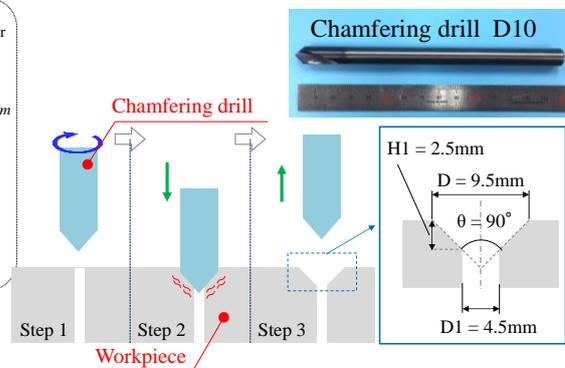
Illustration of chamfering drill and the schematic diagram of the chamfering process.
